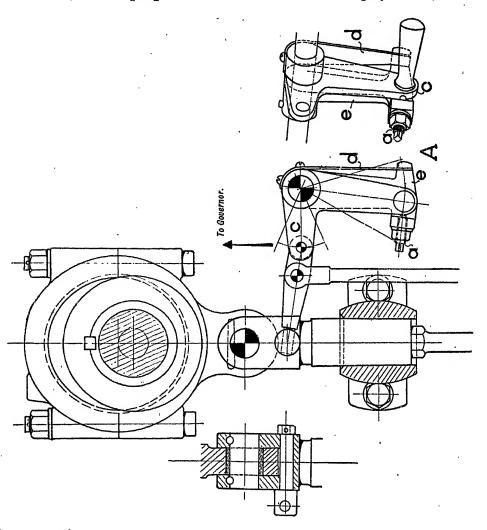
Arrangement of Pump shown in Fig. 274.
